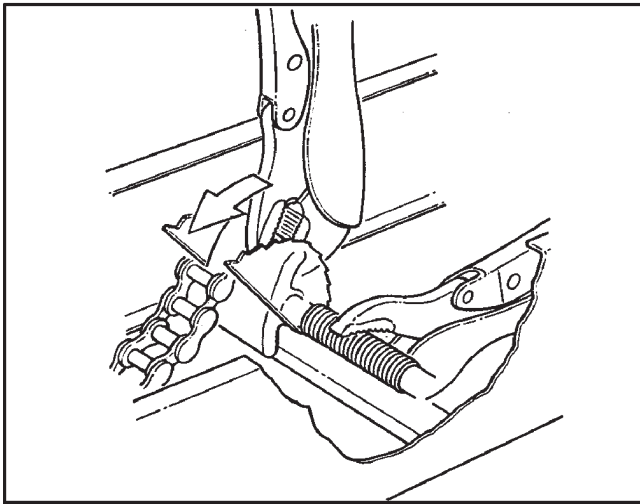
Prying the Slider Block off the Cam Assembly.
